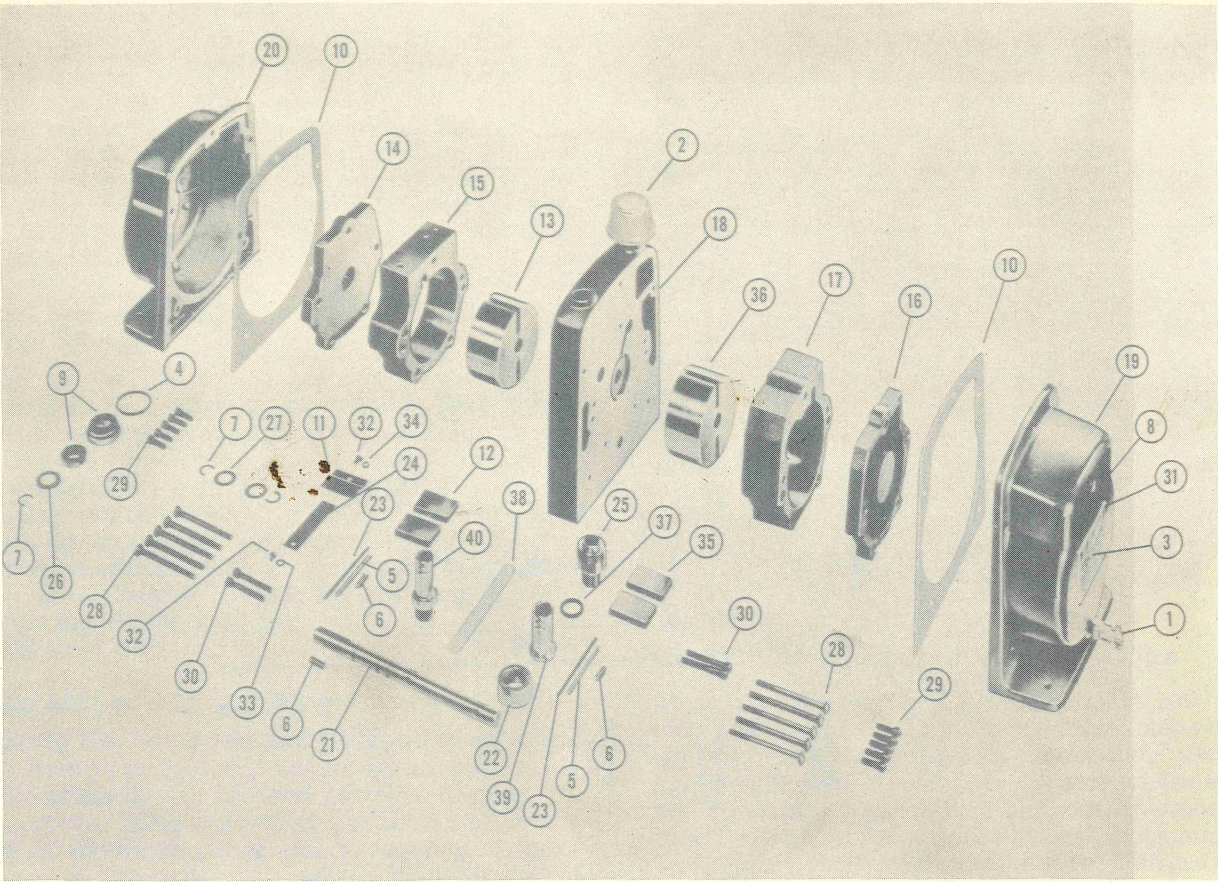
View of the Hyvac 2, 4, 6, 7, and 14 Pumps disassembled.
